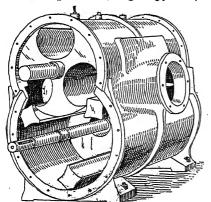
Sturtevant impeller blower casing, with ends and fixed central core removed.
